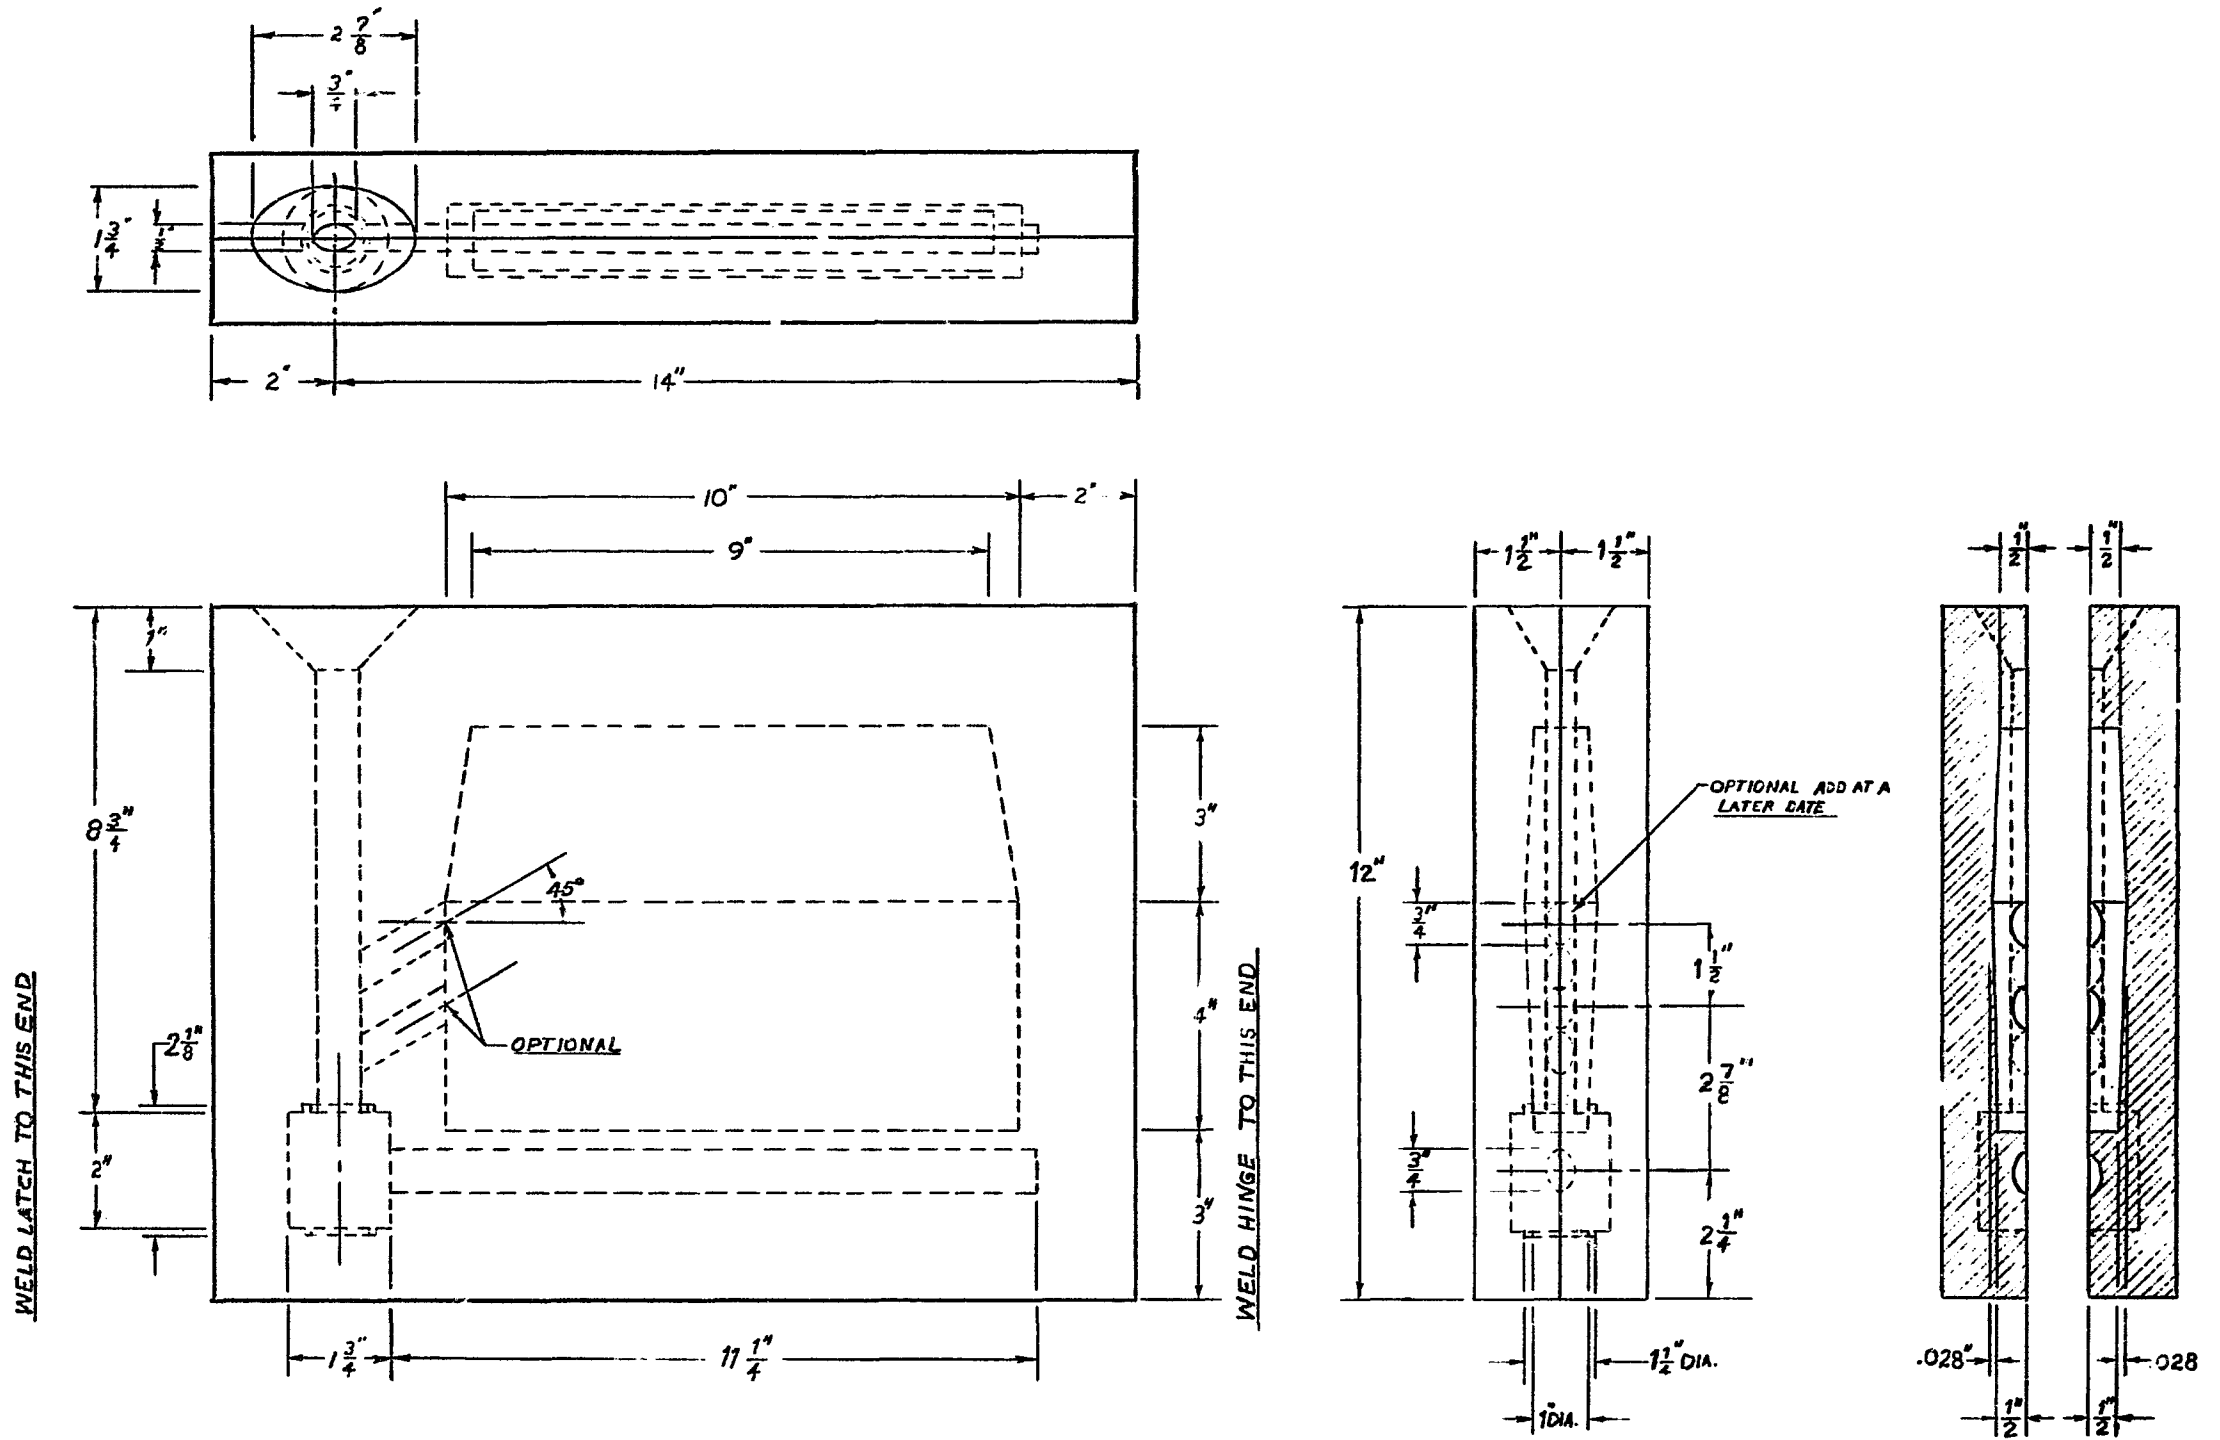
Design of the small-ingot permanent casting mold showing initial dimensions of the sprue and runner. A bottom ingate was added after trial castings. Note: The side tapers are exaggerated in the drawing for illustration.
